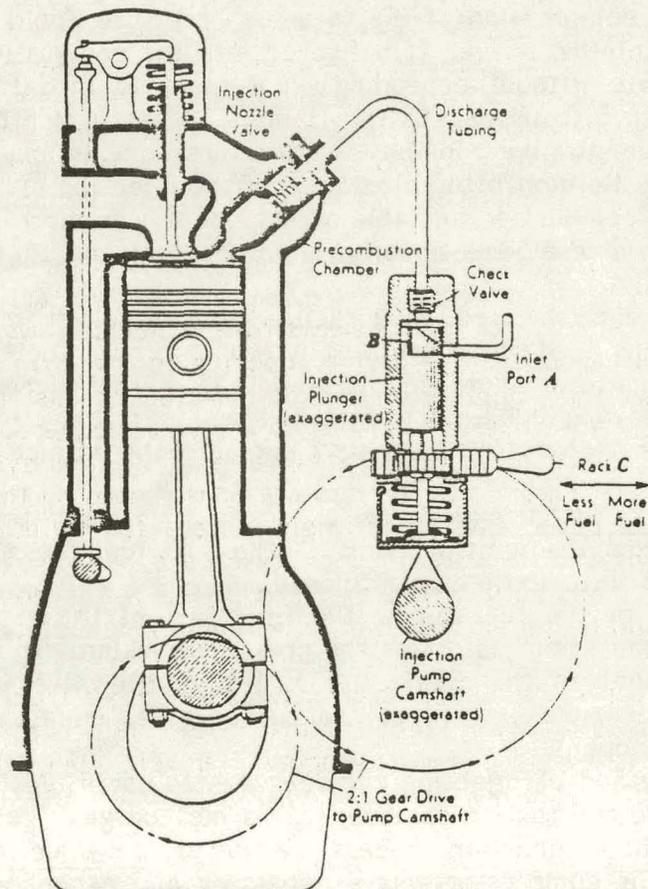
Mechanical or solid injection system on four-stroke CI engine.
